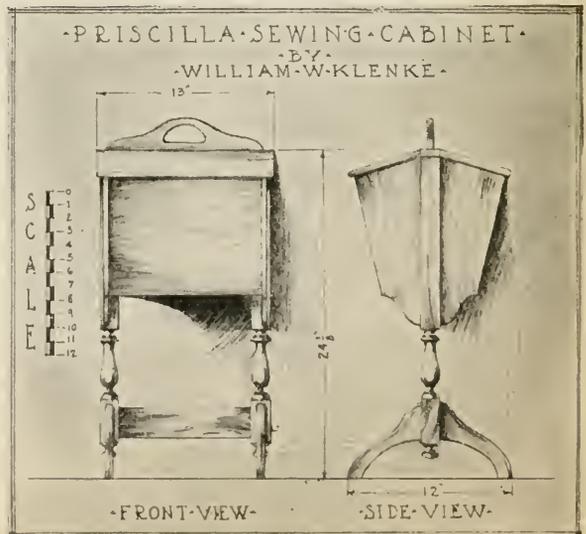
The cabinet sketched in pencil. See Fig. 11 for the completely dimensioned working drawings.
